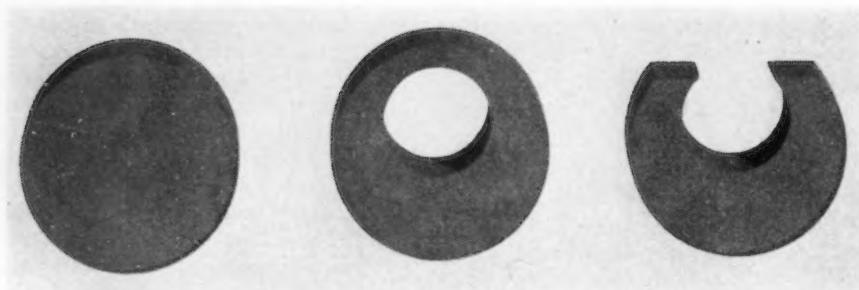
In a partially sintered condition Alnico can be machined, after which a final sintering is carried out.
